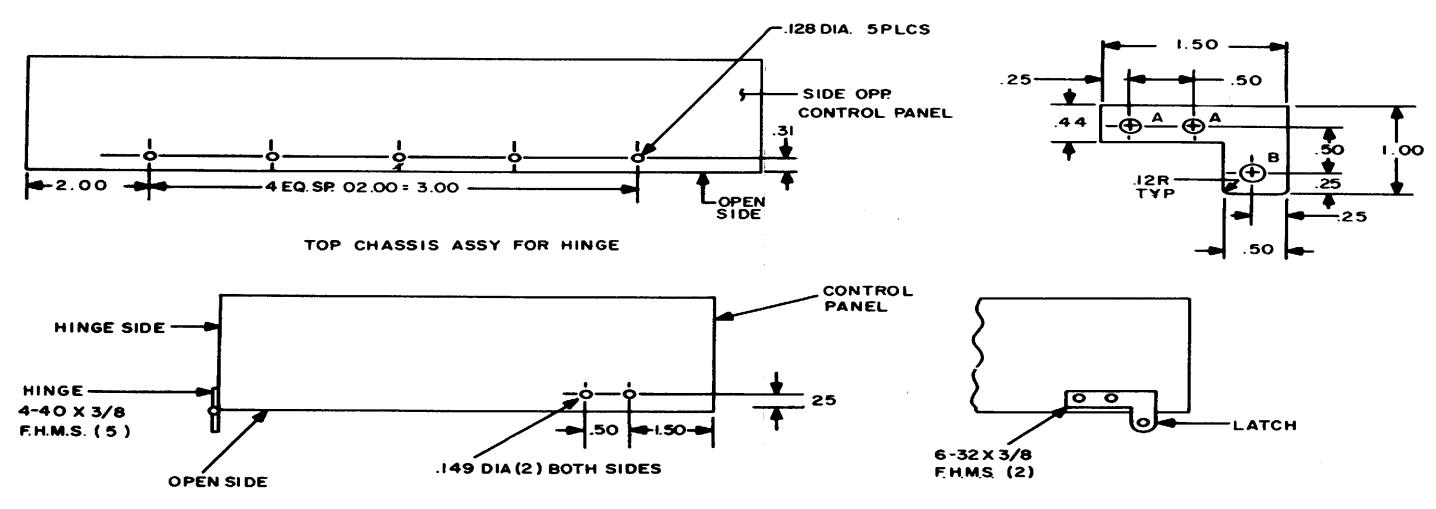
Alarm Monitor Power Supply Test Fixture, Hinge Assembly.
